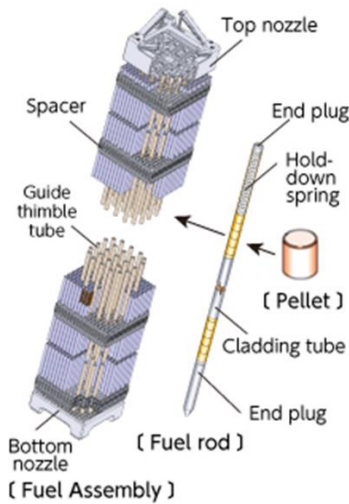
Typical PWR fuel assembly and fuel rod (Mitsubishi Nuclear Fuel Co., Ltd.)
